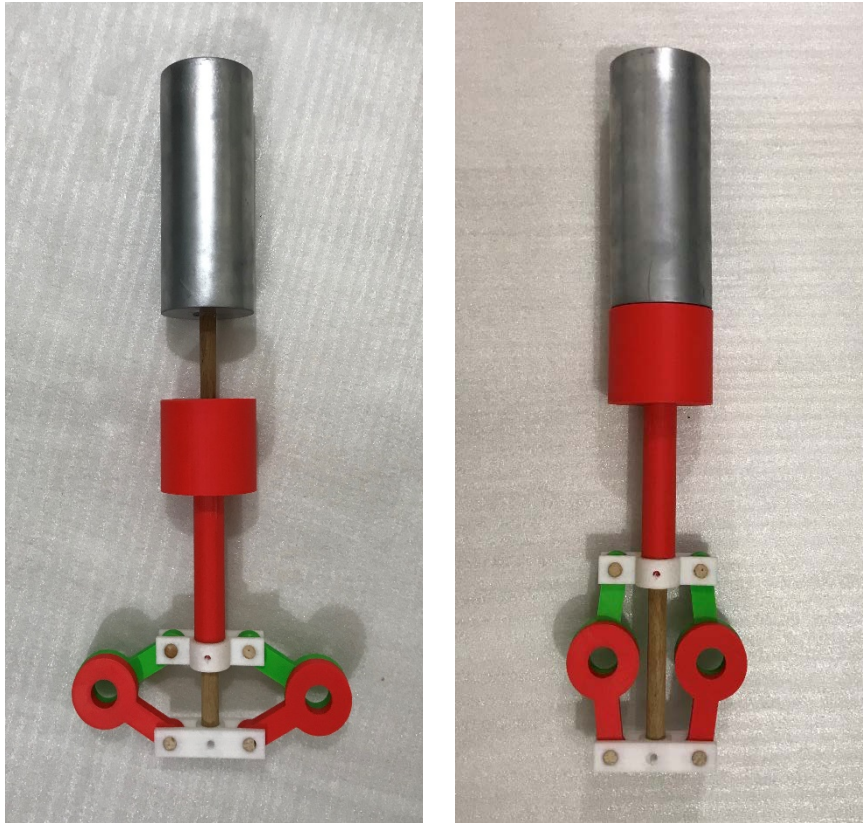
Assembly views of pre-prototype rhombic drive mechanism
